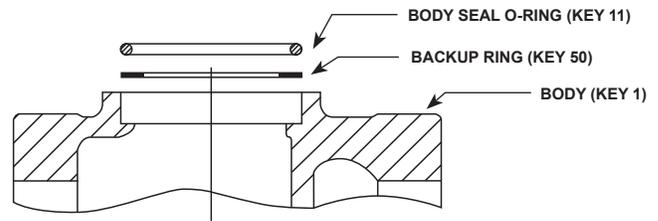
Expanded View of the Body Area Showing the O-ring and Backup Ring Placement
